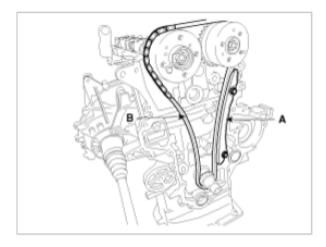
Identifying Timing Chain And Guide Courtesy of HYUNDAI MOTOR AMERICA
